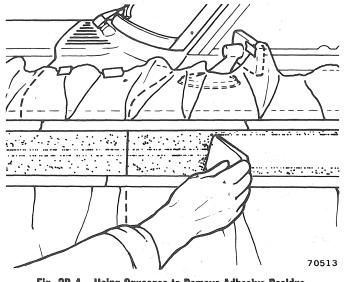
P-4 Using Squeegee to Remove Adhesive Residue
